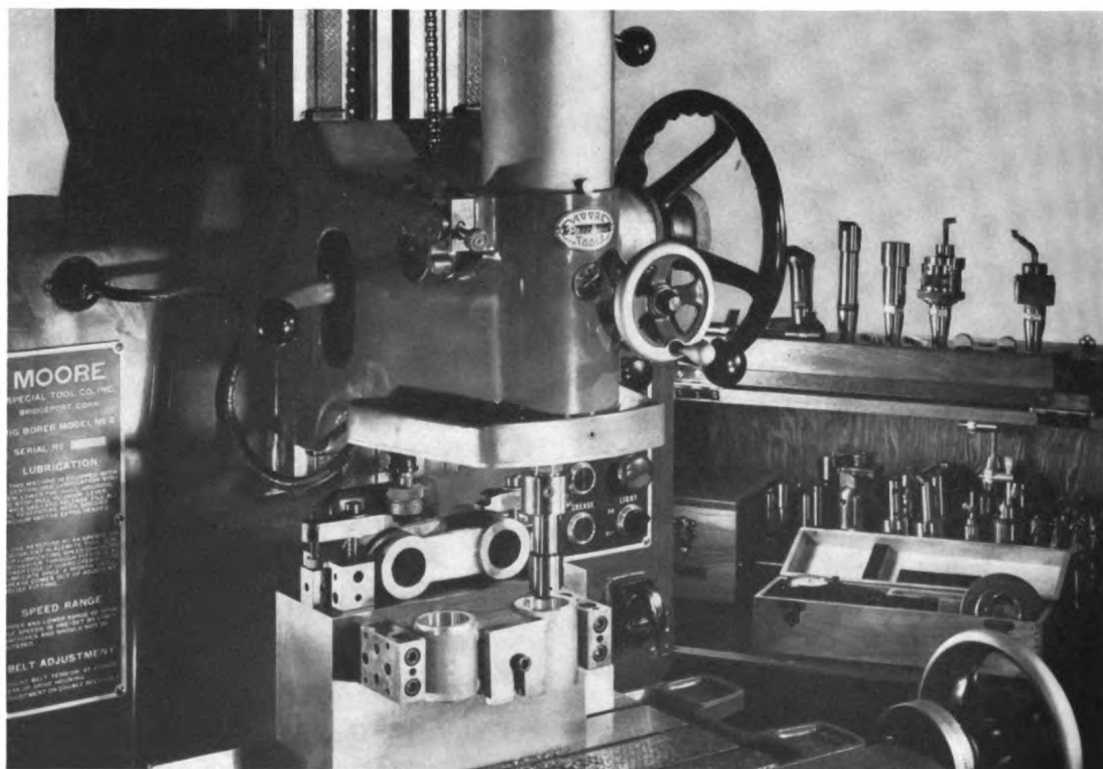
Parallel setup blocks serve as locators in this simple but effective two-position fixture for milling and boring a production part on the Jig Borer.
